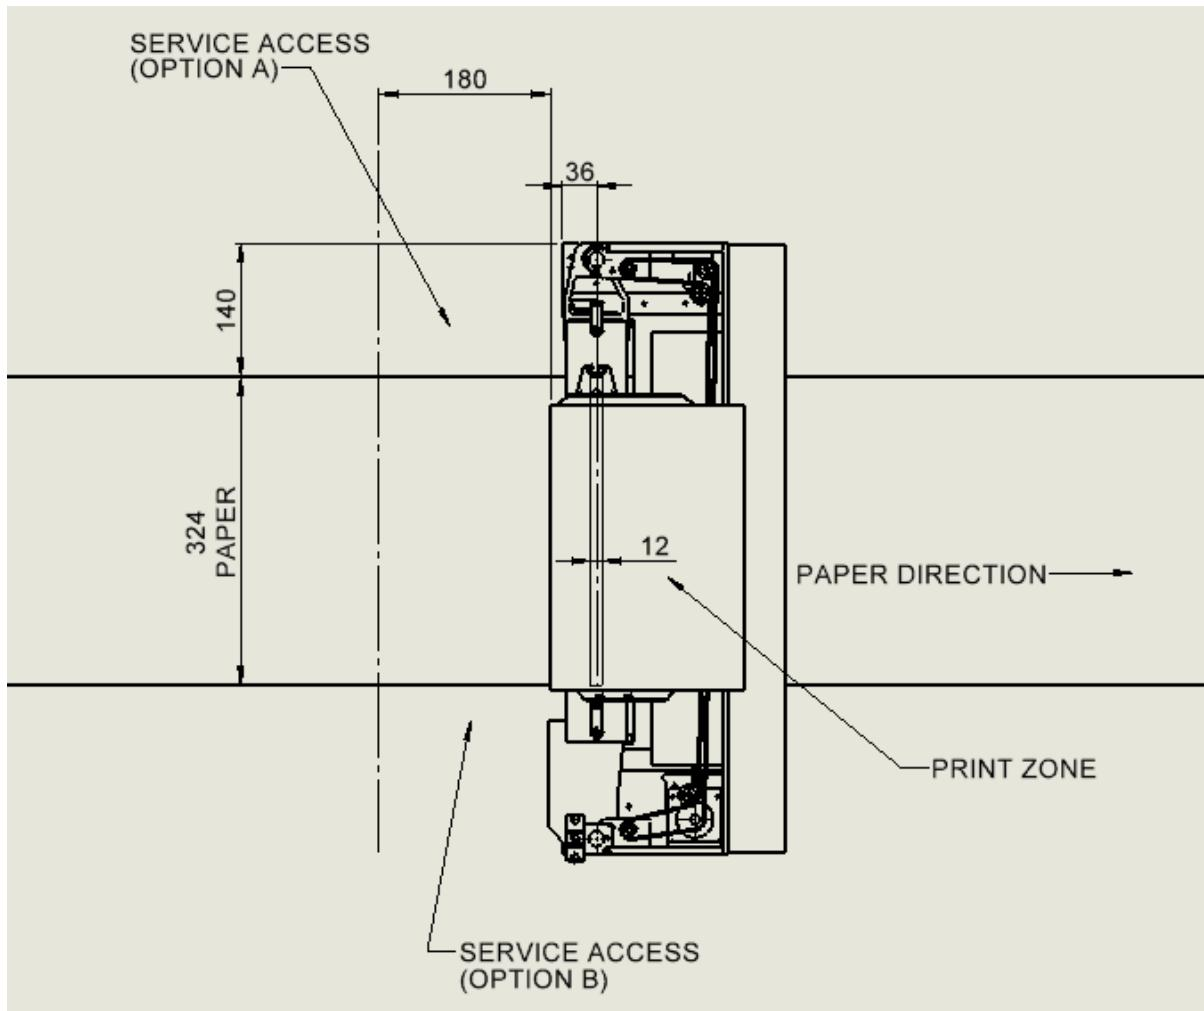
DuraCore 1x1 Print Engine Mounting Points
